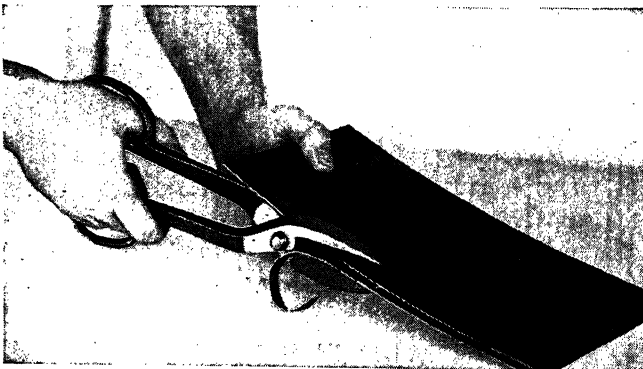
Trimming the edge of a piece of metal. The end of a cylinder would be trimmed in like manner
